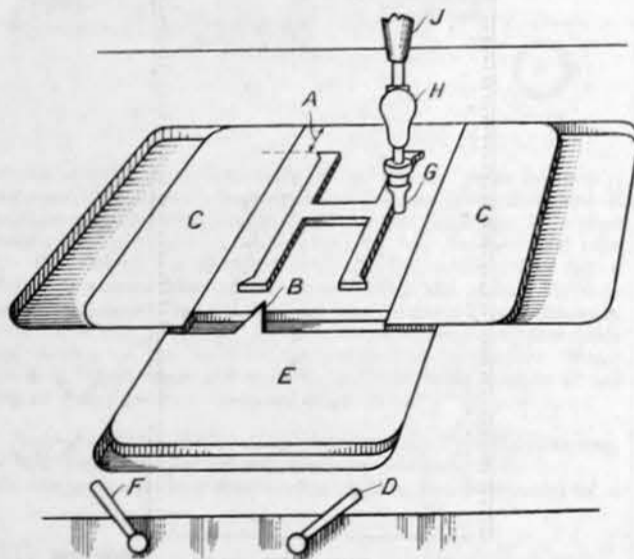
BASE OF PUNCH ENGRAVING MACHINE
